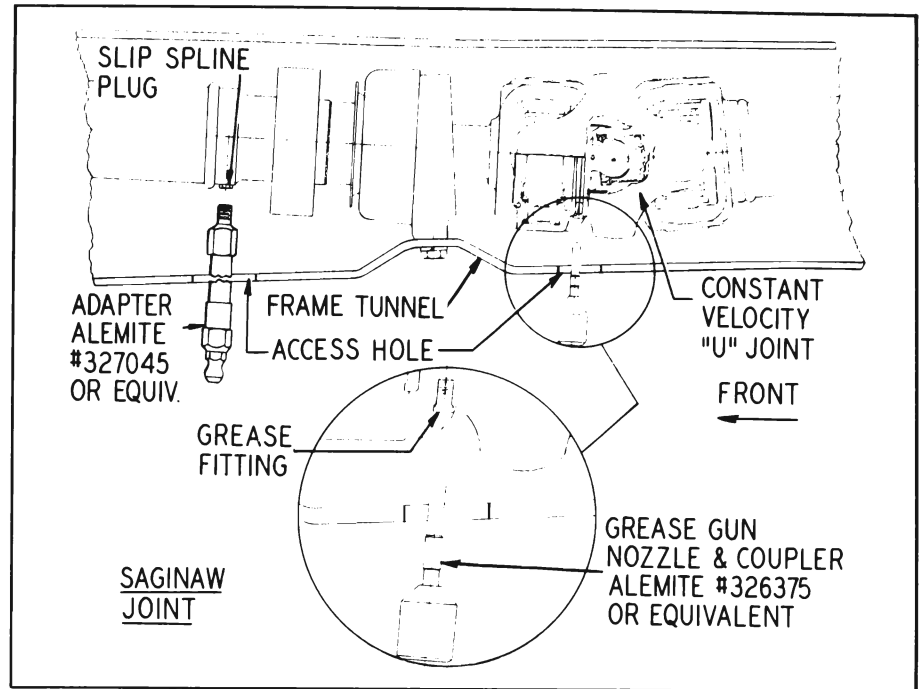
Propeller Shaft Slip Spline and Constant Velocity Universal Joint Lubrication Points
